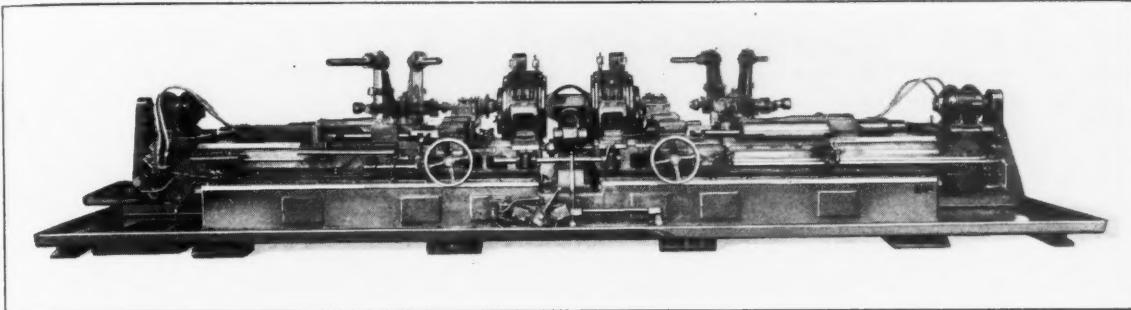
Another Duplex "Fastermatic" Arranged for Machining Truck Axle Housings at Both Ends
